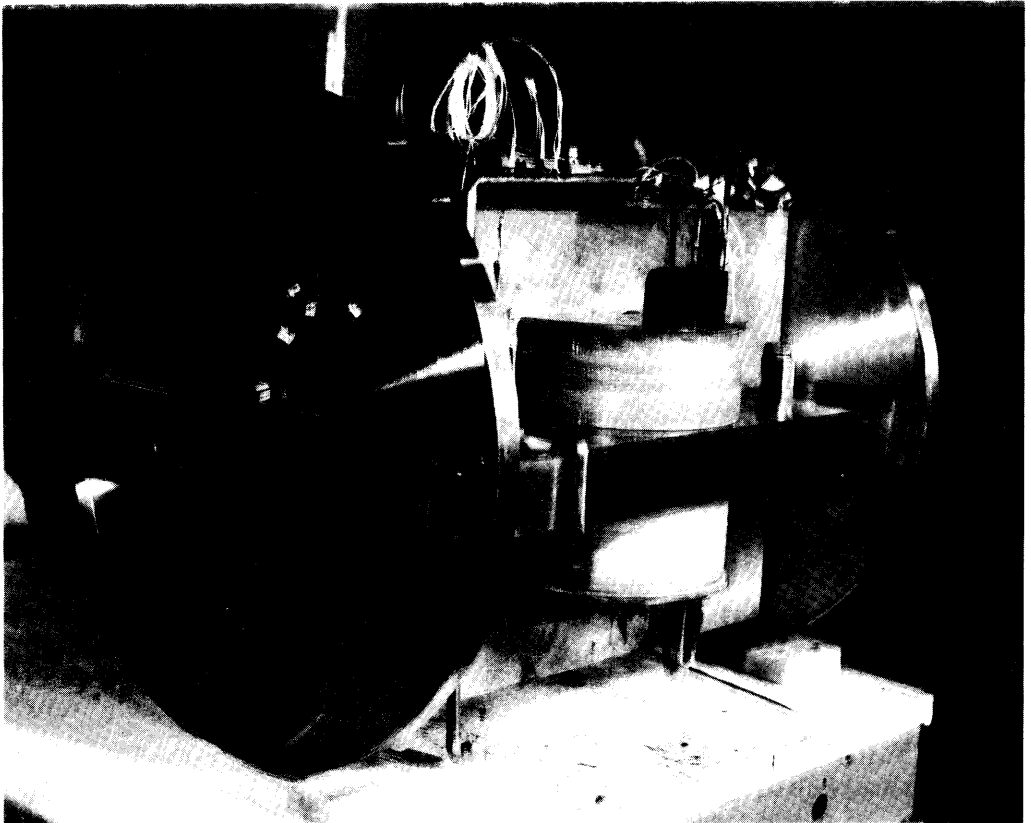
Helium vessel end plates welded to the central plate.
